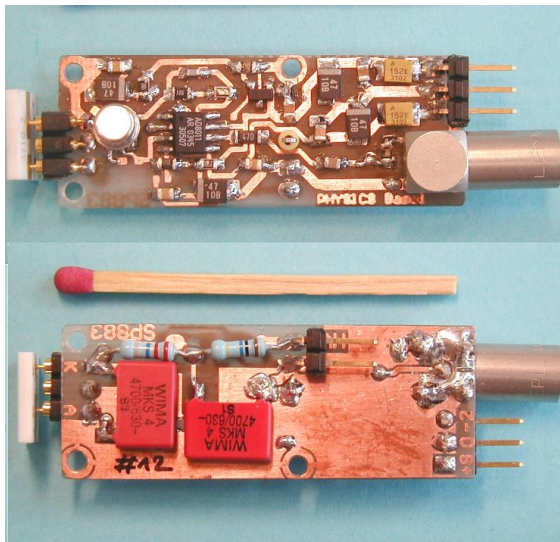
The top and the bottom sides of the LNP-preamplifier. The PCB carries SMD components as well as 'through the holes' components. For mechanical installation of the PCB three holes with a diameter of 2.2 mm are provided.
